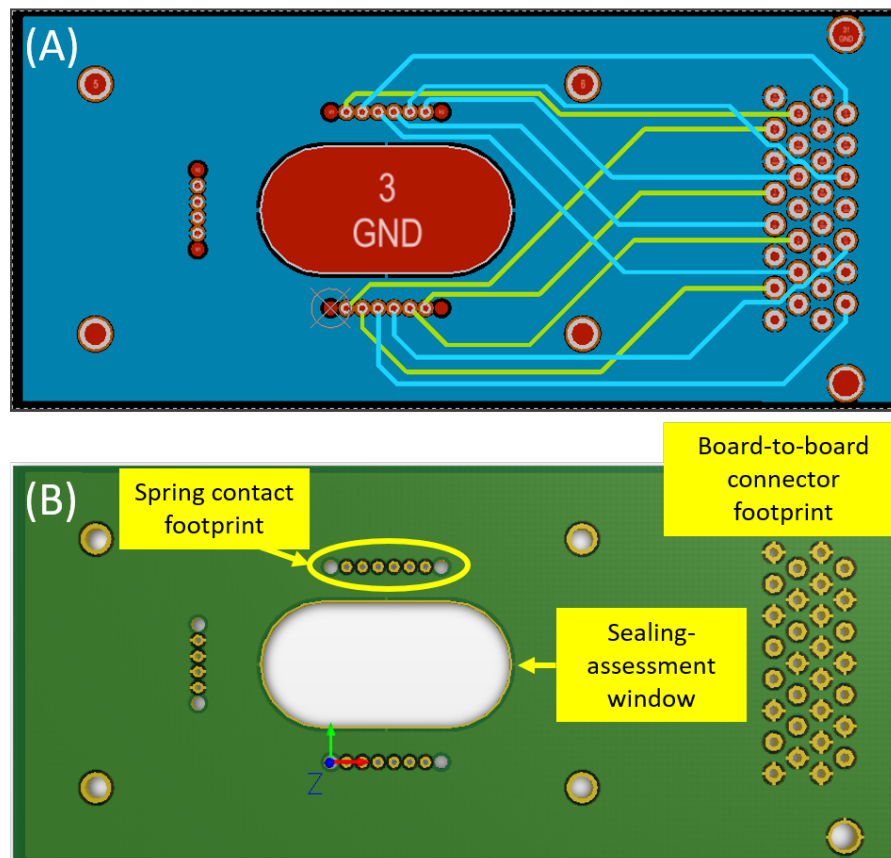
Images of the cartridge PCB. (A) Top view of all the PCB layers, blue plane is the top layer, blue tracks are in the intermediate-top, light blue ones in the intermediate-bottom while the bottom layer, being identical to the top layer is not visible as completely covered by it. (B) 3D view of the PCB
